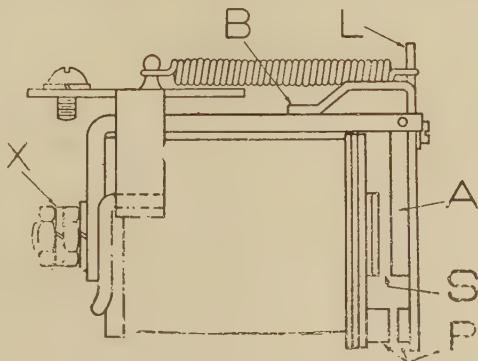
Illustrating Adjustment of Cut-out Relay.
